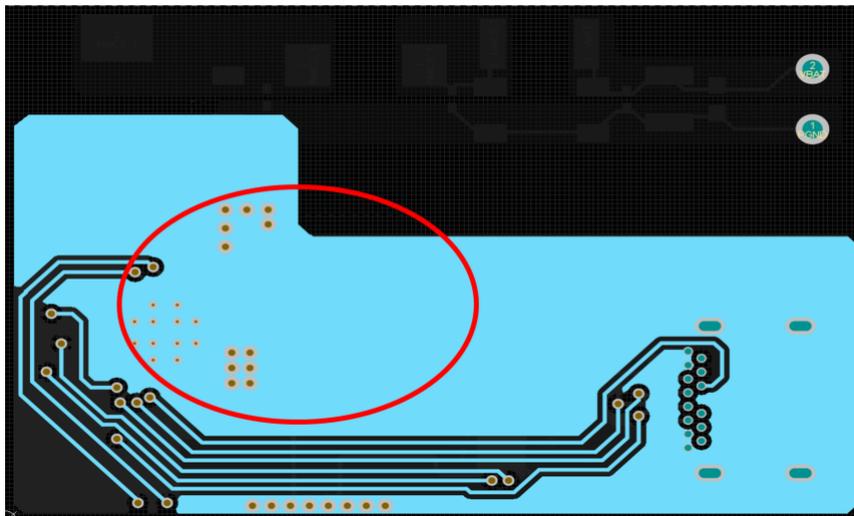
Third Layer of the PCB Layout for the TPS2583X
